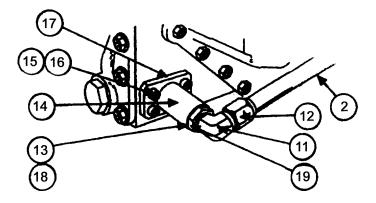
Adapter, Elbow and Oil Fill Tube Assembly. (Repeated).
